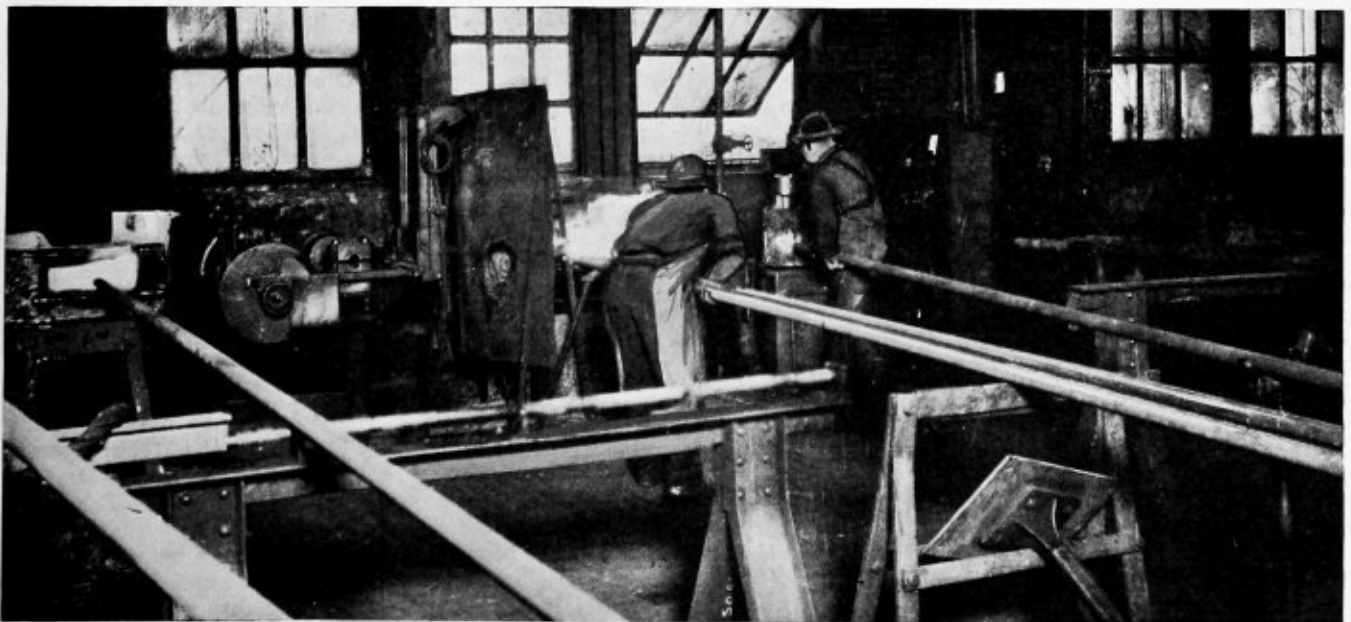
The Entire Safe Ending of Boiler Tubes Is Carried Out on the Equipment Here Shown, While to Finally Cut the Tubes to Length an Additional Heating Furnace and Combination Hot Saw and Expanding Machine Are Used
